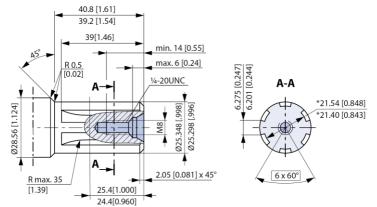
OMP shaft version: Splined shaft B.S. 2059 (SAE 6B); US version
